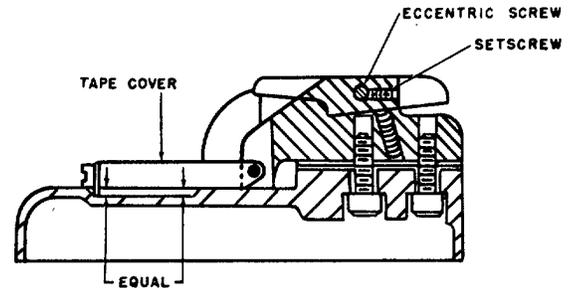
Top cover preliminary adjustment (TT-76A/GGC and later models).
